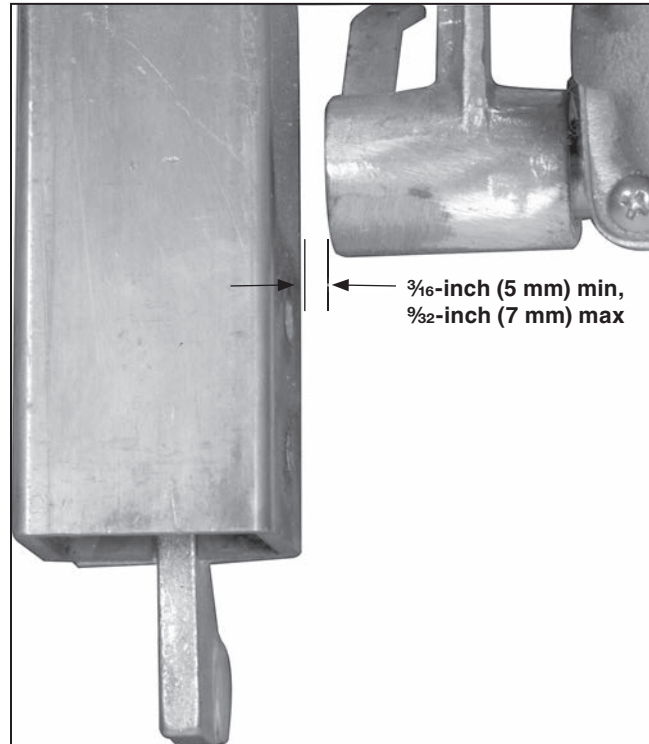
There should be a gap between the end of the interrupter lever shaft and the blade assembly.
